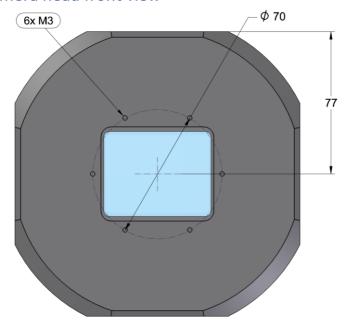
C5S camera head interface for filter wheel or tiltable adapter base
